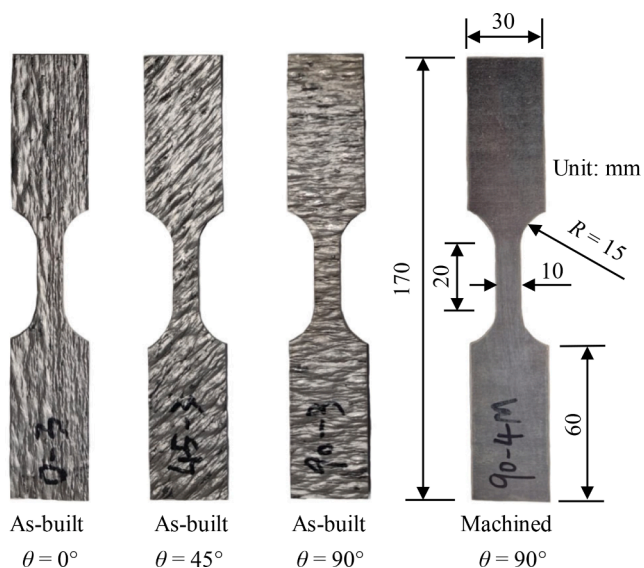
Typical as-built and machined LCF coupons and nominal dimensions of all coupons.
